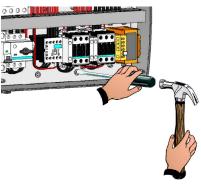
Using a screwdriver, press the four pre-set holes on the back to make the four fixing holes of the electrical panel
